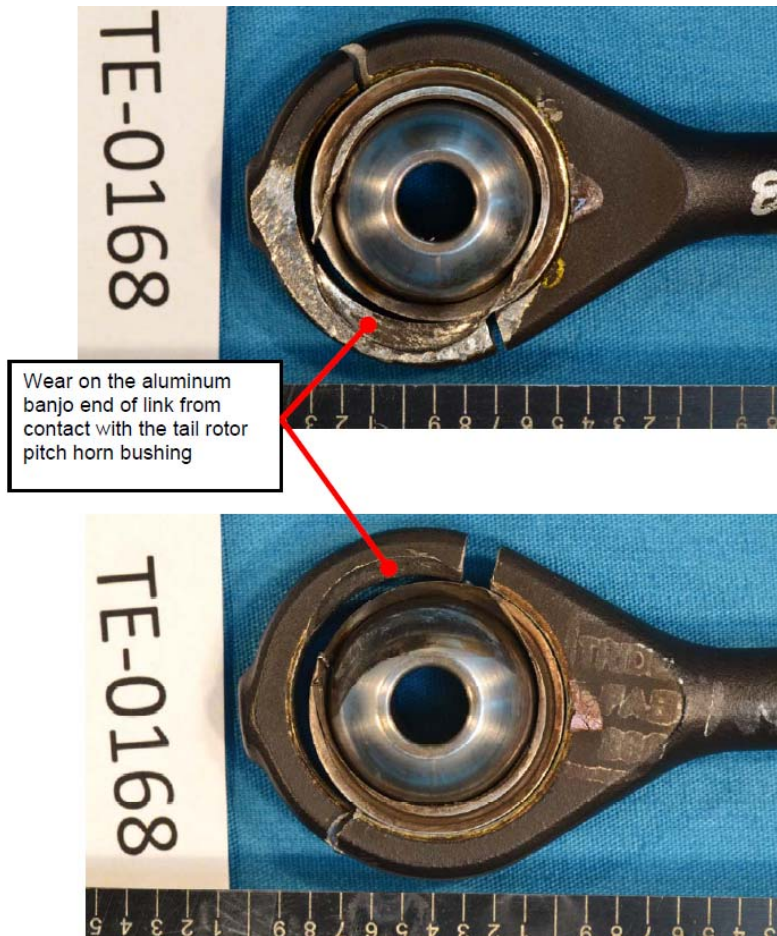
The fractures observed on the pitch horn-side circular end of PCL S/N TE-0168.
